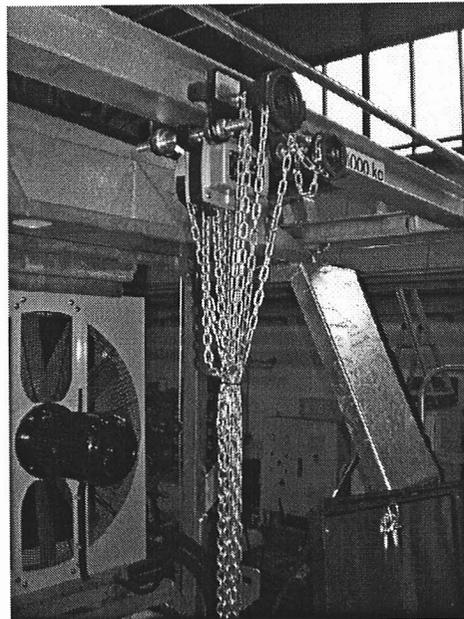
Spur gear chain pulley block with hand-gear trolley and locking device
